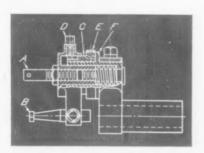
Drawing of recessing tool. Right- or left-hand operation is obtained by engaging screw (D) in either of two slots in sleeve (C)
